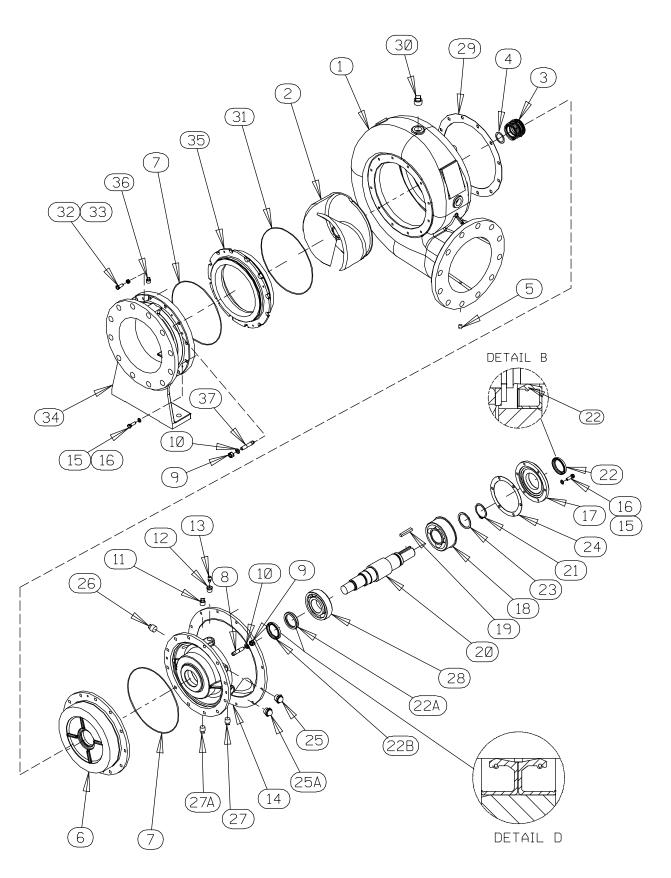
610N60-(SAE 3/11.5) Pump End Assembly
